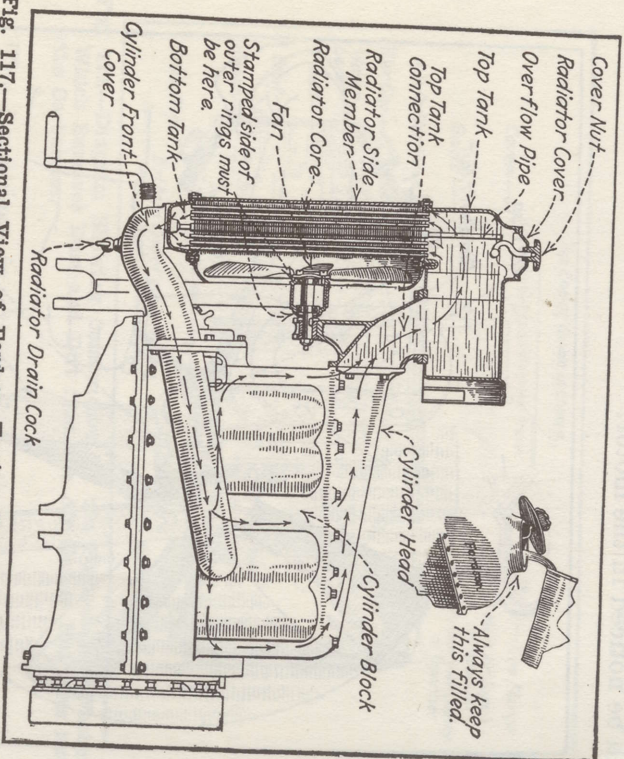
Sectional View of Fordson Engine Showing Water Cooling System. Inset Shows Method of Filling Radiator.
